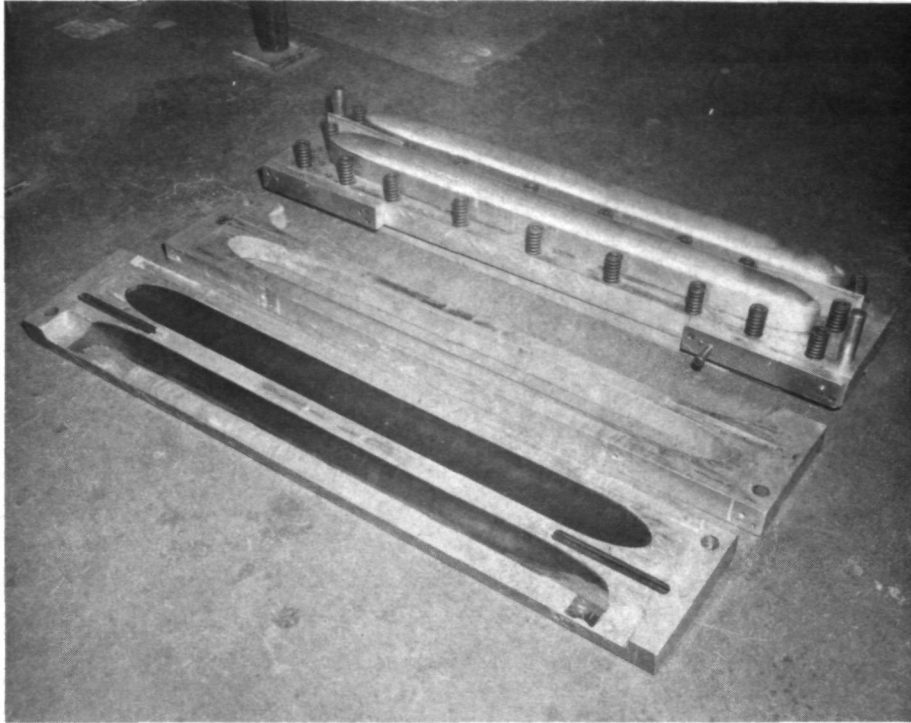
FIRST STAGE END CLOSURE FORMING TOOL
